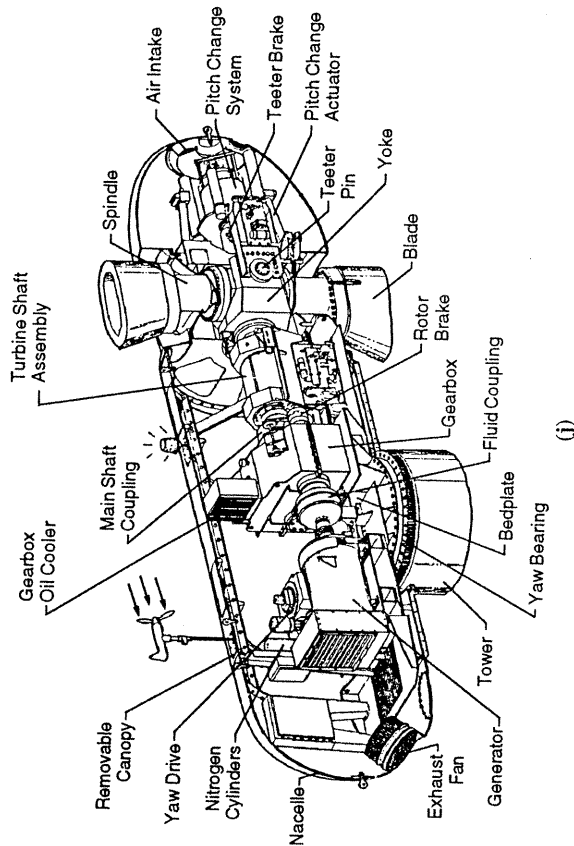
Power trains in representative medium-scale HAWTs (Concluded). (j) 600-kW WVG-0600 HAWT. (Manufactured by Westinghouse Electric Corporation)
